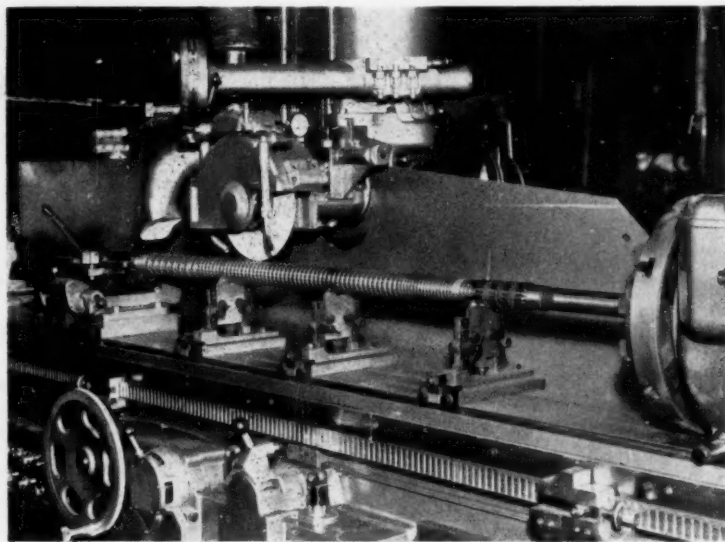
Close-up View of the Spline Grinder Shown in Fig. 1
